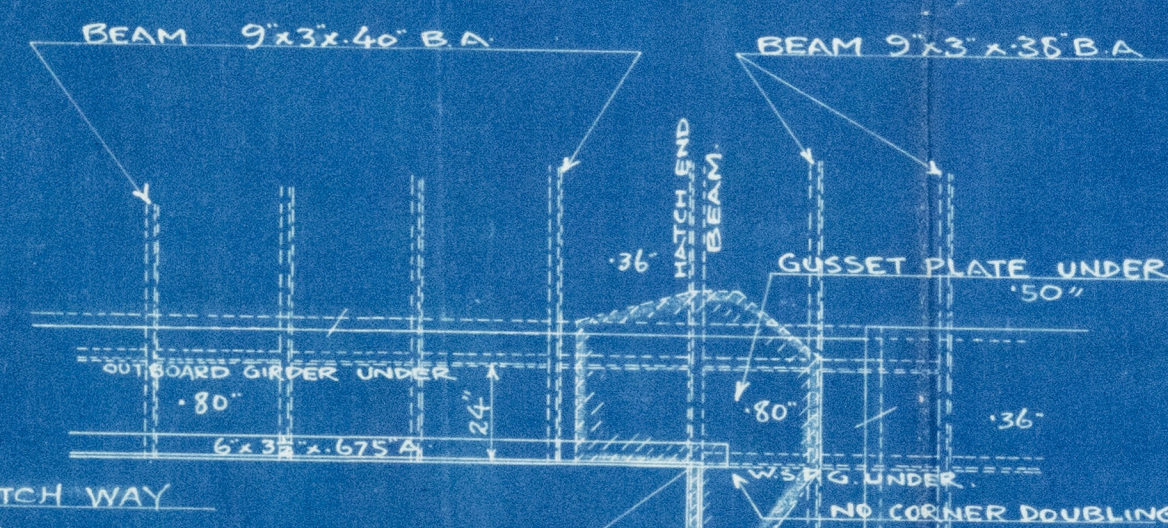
DETAIL SKETCH OF TWIN GIRDERS ABREAST N^o 2 CARGO HATCH ON 2ND D^K.
